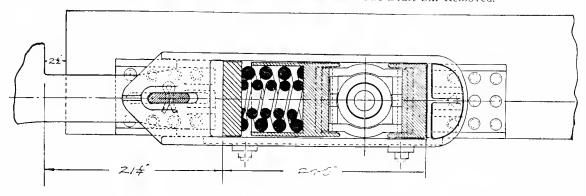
Butler Friction Draft Gear No. 370 with One Draft Sill Removed.
